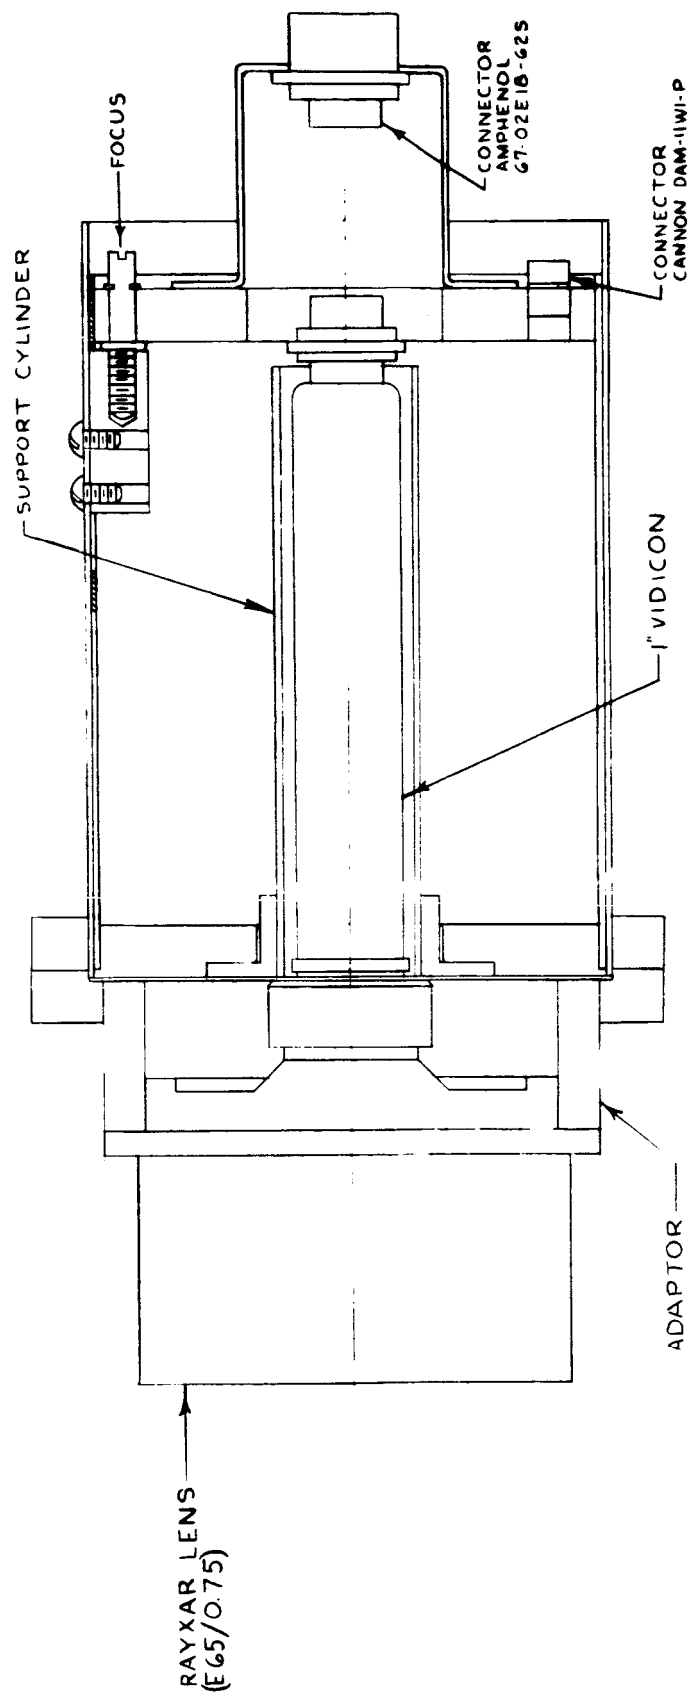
Assembly Rayxar 15° Lens and Vidicon Capsule
